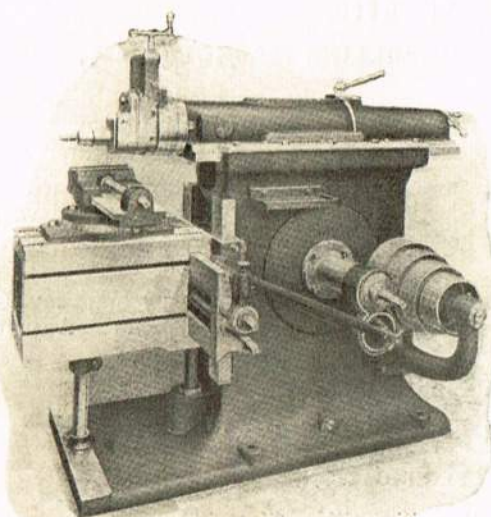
HAND PLANING MACHINE OF IMPROVED DESIGN.
